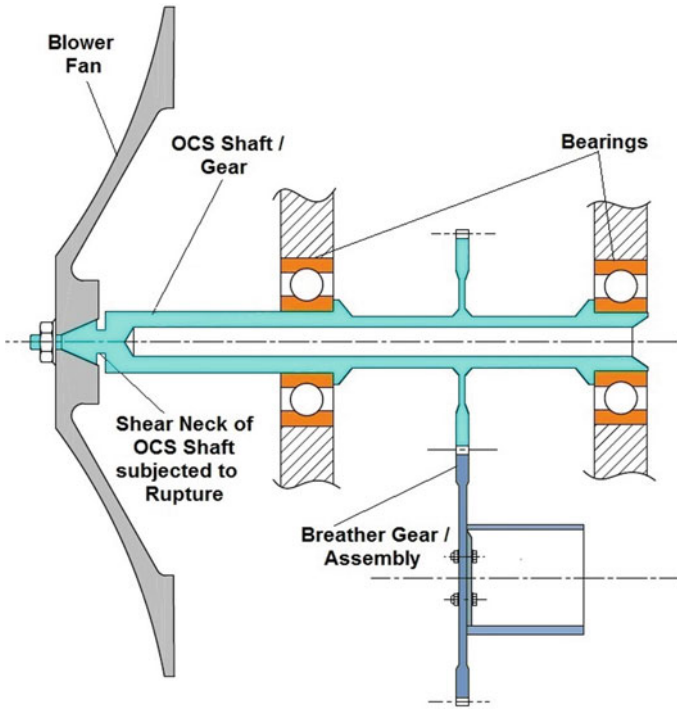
Schematic view of drive shaft arrangement of the oil cooling system
